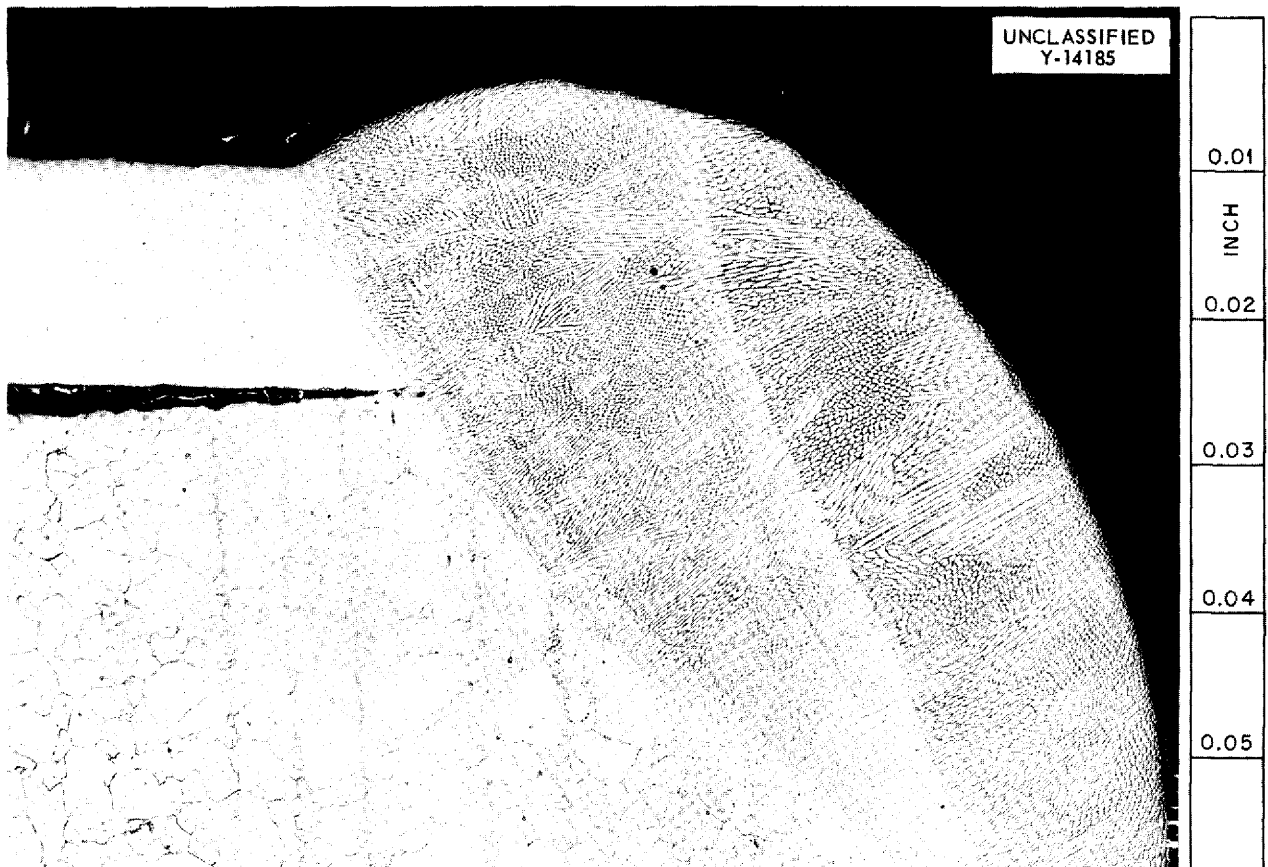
Inconel Tube-to-Header Weld Prepared Under Optimum Welding Conditions. Excellent penetration and weld quality obtained. Etched with electrolytic oxalic acid. 75X.
